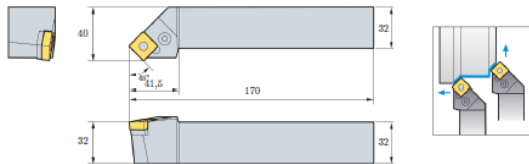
Tool holder Korloy PSSNR3232-P19 [9]
